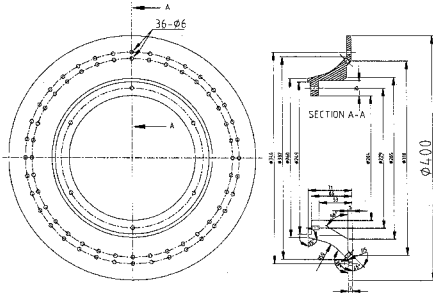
Configuration of the test impeller wheel and locations of vane holes
